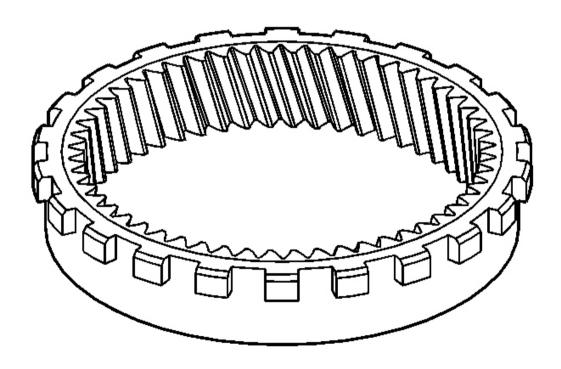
Inspecting Annulus Gear Teeth Courtesy of GENERAL MOTORS CORP.
